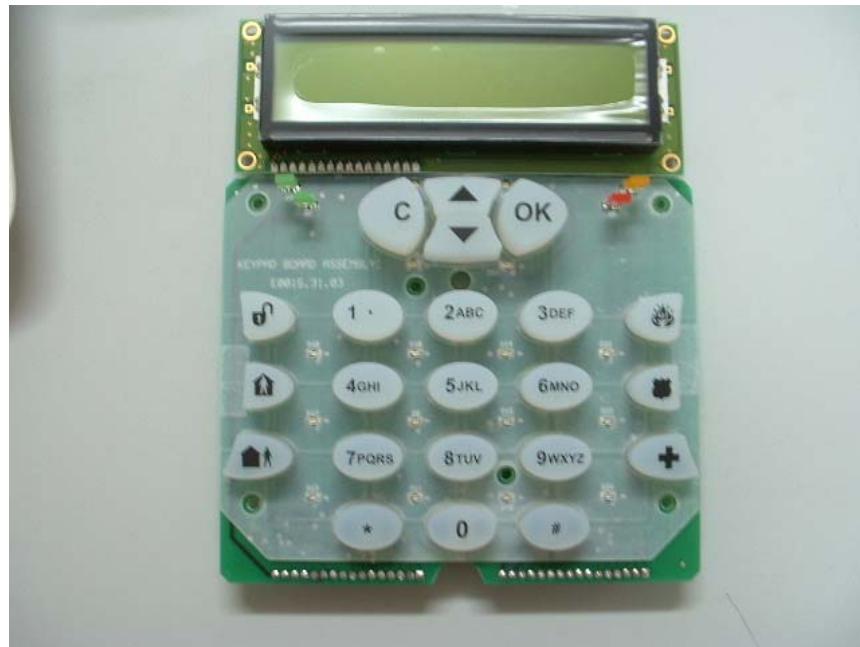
PCB 2 Side 2 With Cover (Buttons)
